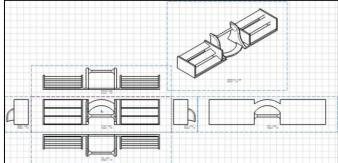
Assembly – Negative (-15°) Angle of Attack – Different Views
